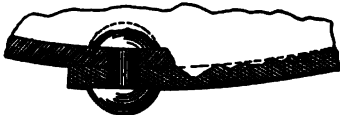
Boiler-shell weakened by corrosive grooving.
